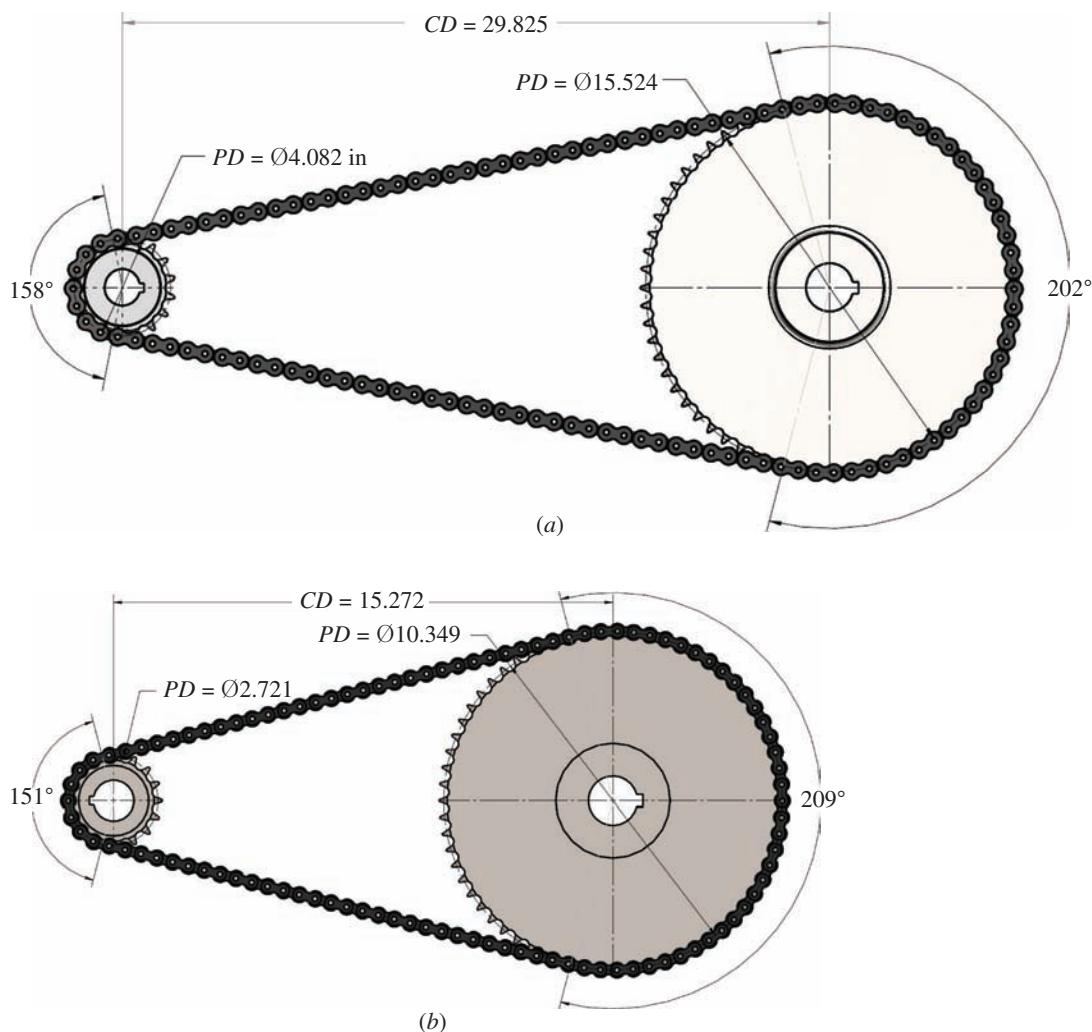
Scale drawings of layouts for chain drives for Example Problems 7-5 and 7-6
